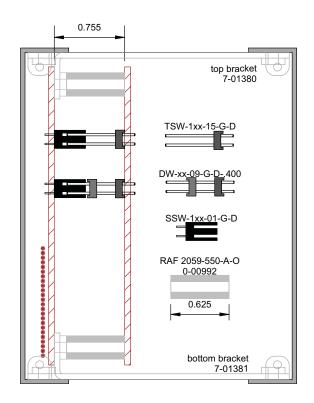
Double-wide module with daughter board. Two header options are shown. If a larger board-to-board gap is needed, substitute 0-993 (11/16 standoff) in place of 0-992 (5/8 standoff), and TSW-1xx-17 for TSW-1xx-15 (longer header); this will change the gap from 0.755 to 0.817.
